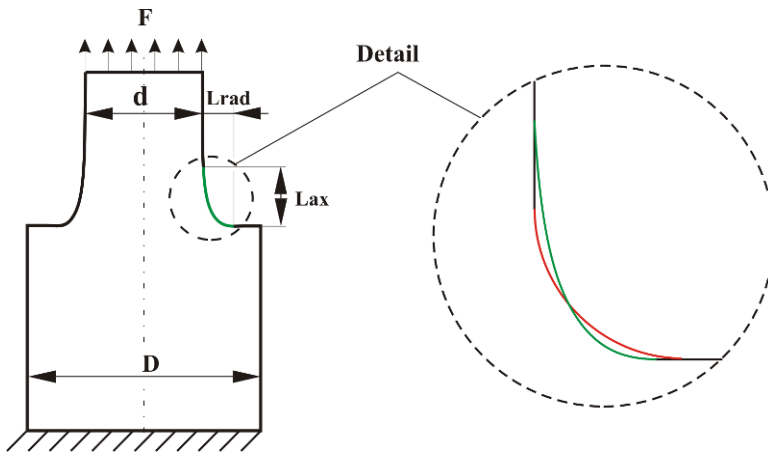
Model of the stepped tension plates. The fillet shapes formed by radius (red) and MTT (green) are shown in Detail
